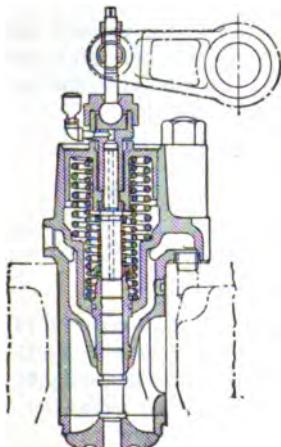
Worthington six-cylinder marine, exhaust valve and housing.
